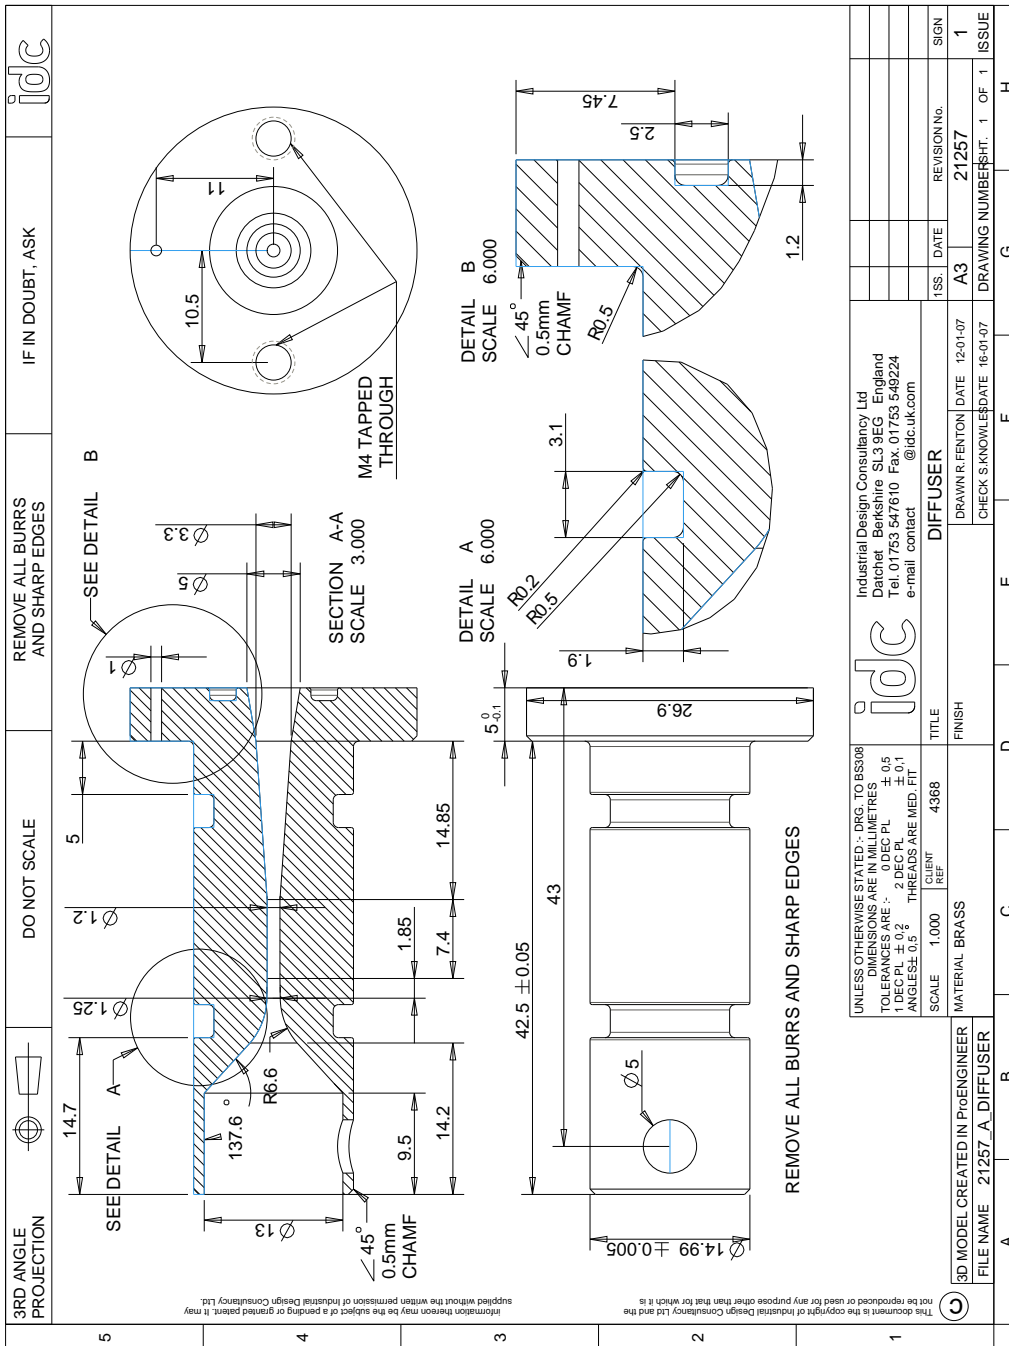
Dimensioned drawing of the jet-pump diffuser
